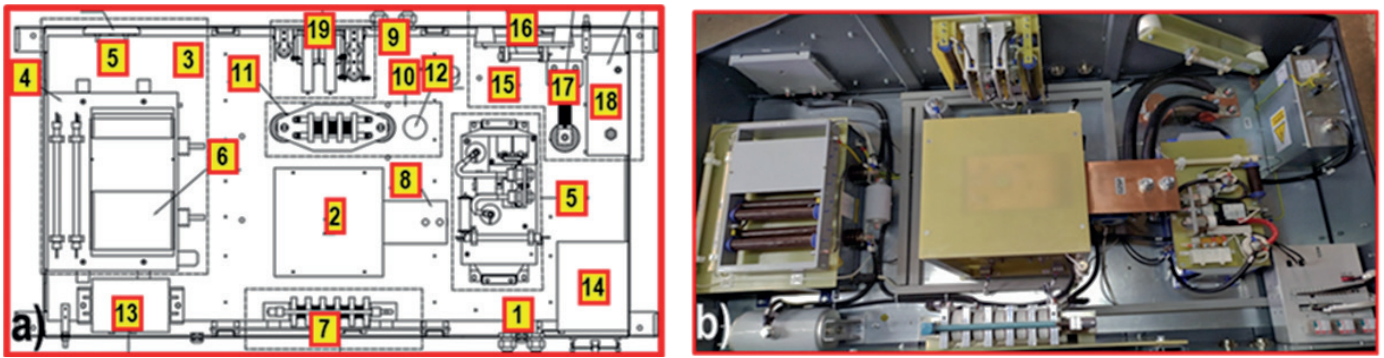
Top view of the complete prototype of the DCU-HM 3/1.6 circuit breaker in the roof version. a) Design sketch with visible assemblies. b) Photograph of the prototype. 1 – mains connection terminal, 2 – vacuum switch assembly, 3 – induction-dynamic drive, 4 – counter-current capacitor, 5 – commutation choke, 6 – resistor, 7 – thyristor unit, 8 – overcurrent relay, 9 – receiver connection terminal; 10 – internal surge arresters; 11 – diode, 12 – varistor; 13 – external surge arrester (varistor); 14 – control unit, 15 – energy measurement system, 16 – fuse, 17 – measuring shunt, 18 – energy meter, 19 – contactors unit
